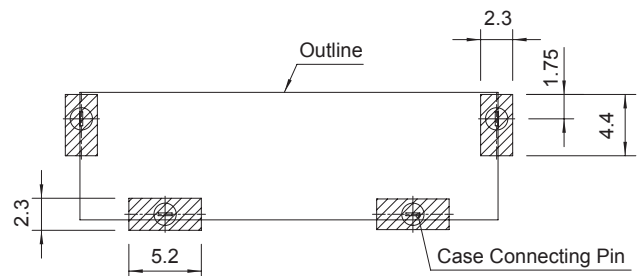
Area where Pattern Layout should not be Placed for SUT
